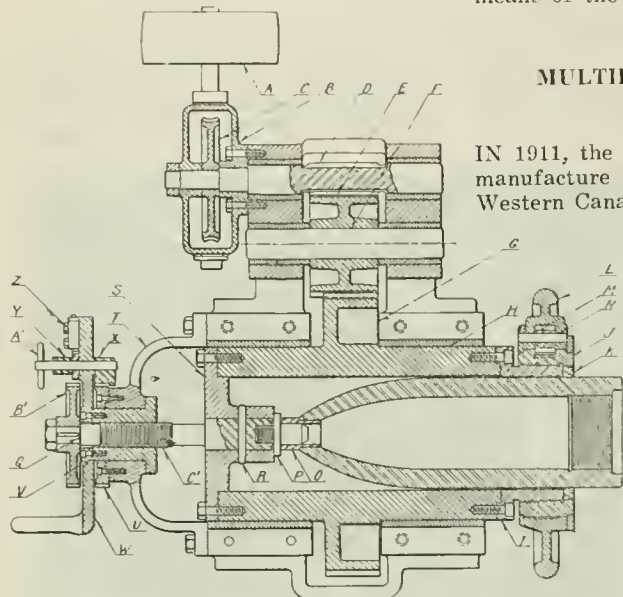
SPECIAL THREAD-MILLING MACHINE DETAIL.
